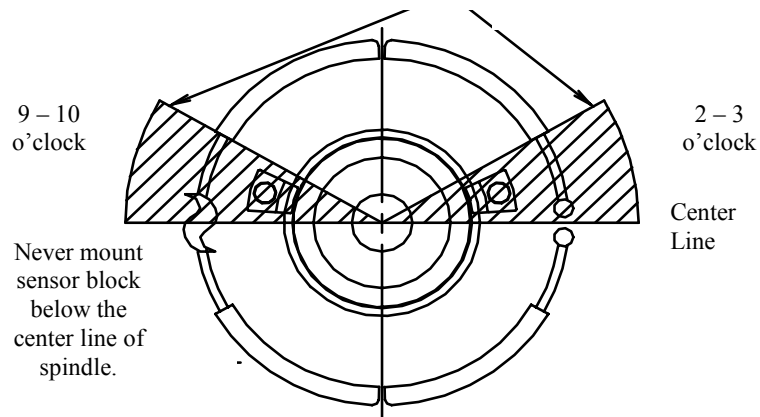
Preferred Wheel Speed Sensor Mounting Block Location
